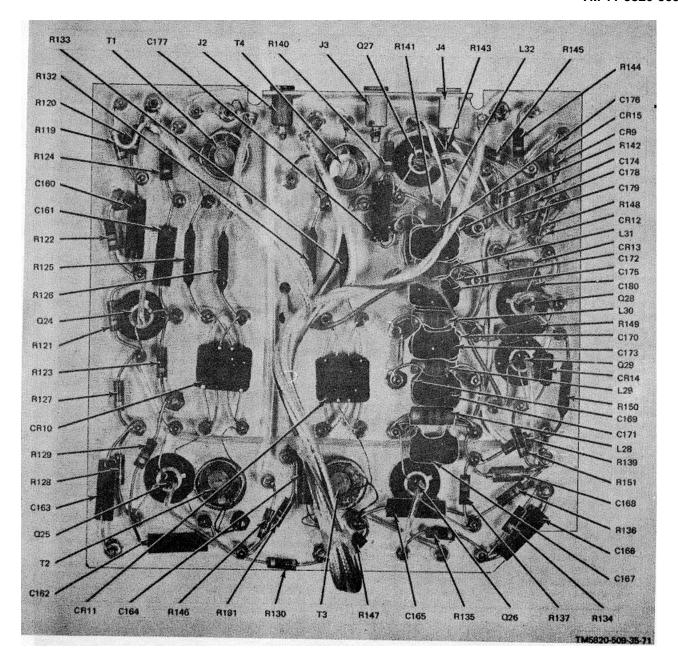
Oscillator Control C-4311/PRC-47 (A8A7), Card Assembly TB1.
